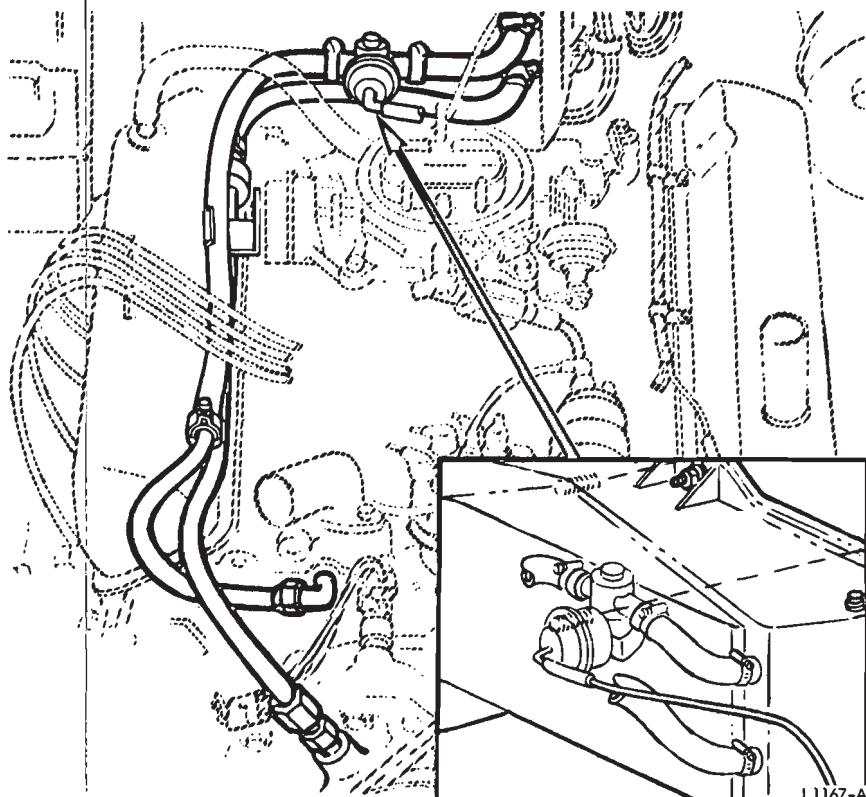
Heater Hose Routings and Water Valve Installation—Continental Mark III
